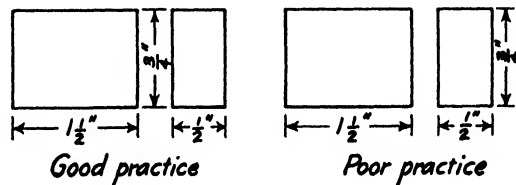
Dimensions which apply to two views should be placed between them.
